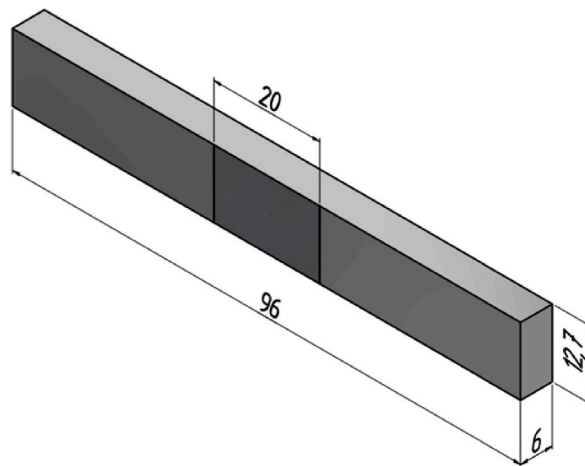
Dimensions of ASTM D790 standard bending testing specimens.
